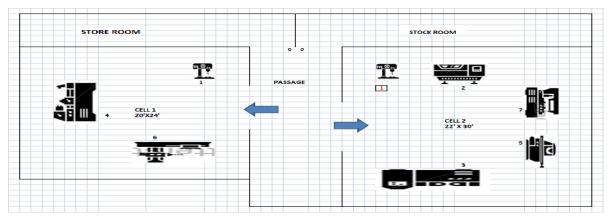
Cell layout design for Bench mark problem 1-7machines x 8 components Bench mark problem
